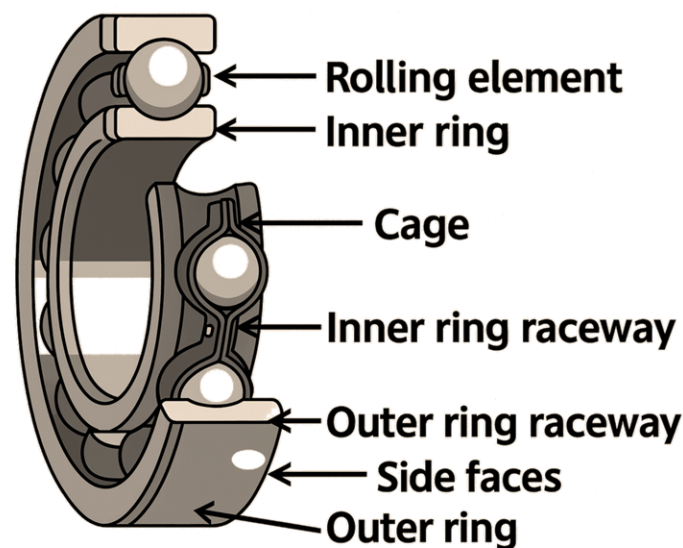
Diagram of the construction of a rolling bearing [82].
